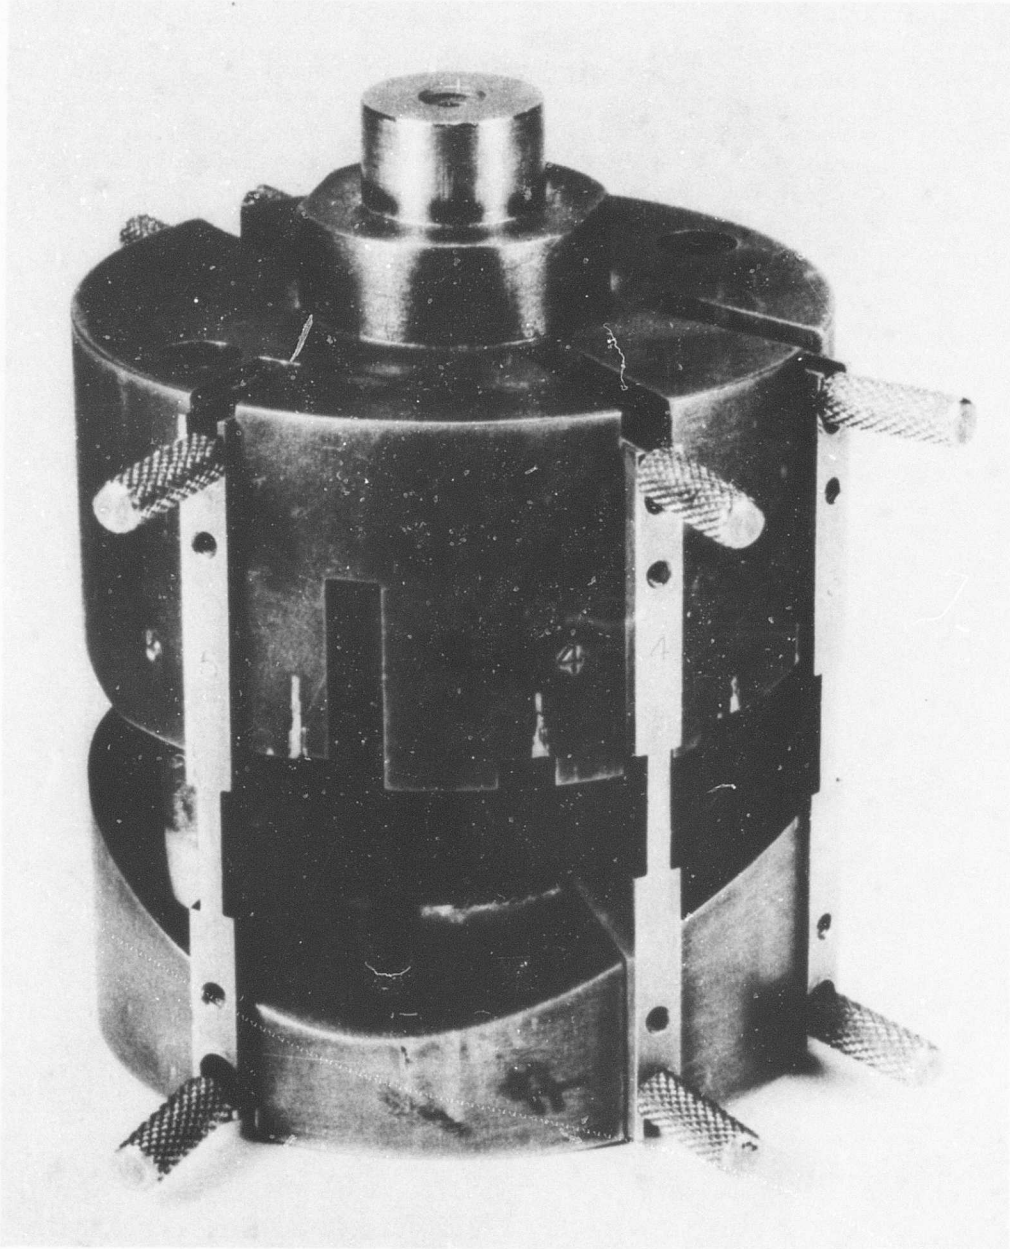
Stator Vane Welding Fixture - Assembled.
